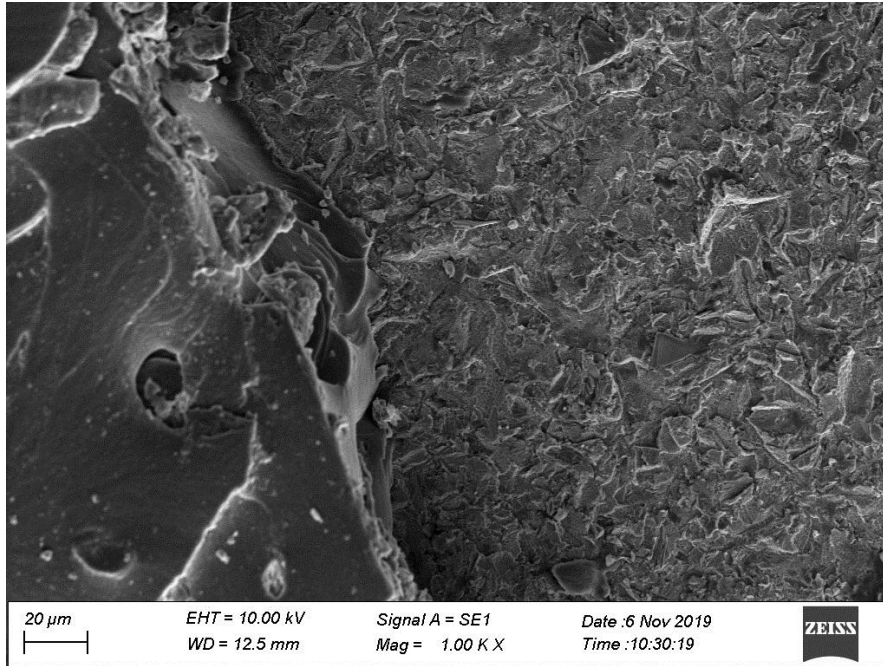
SEM fracture initiation surfaces of the Trim tab (1000X)
